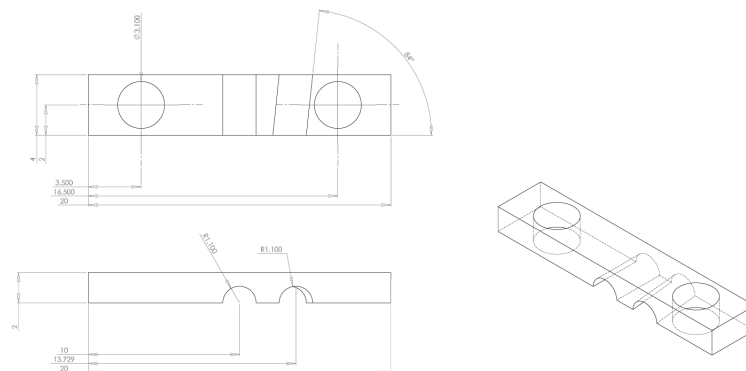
A SolidWorks drawing of the surface ion trap oven holder clamp.
